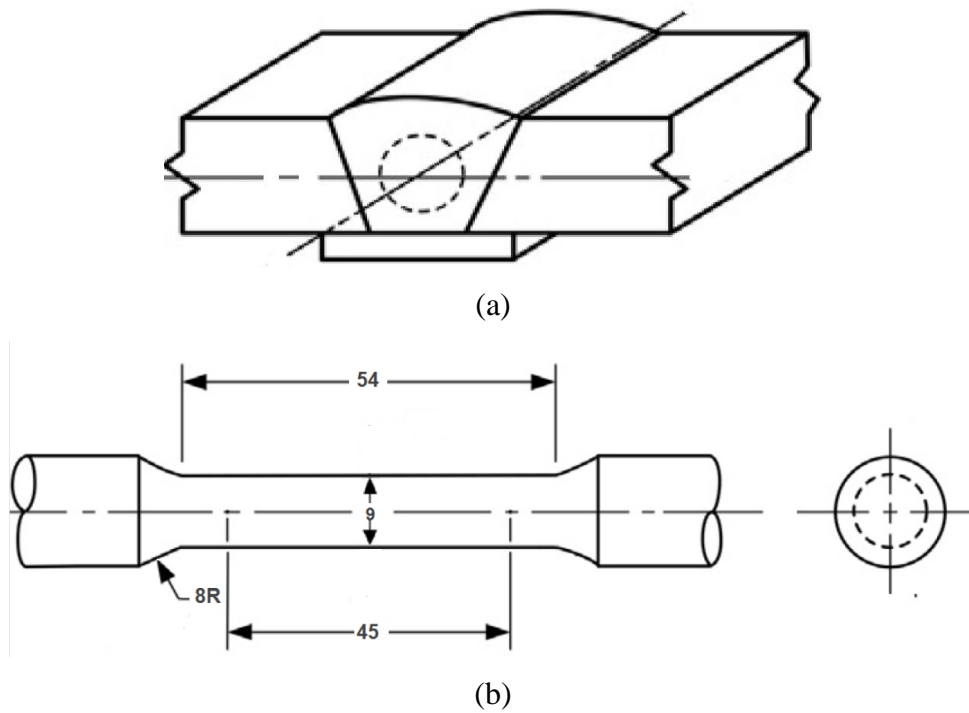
Weld plate showing the location of various test specimens (all dimensions are in mm).
